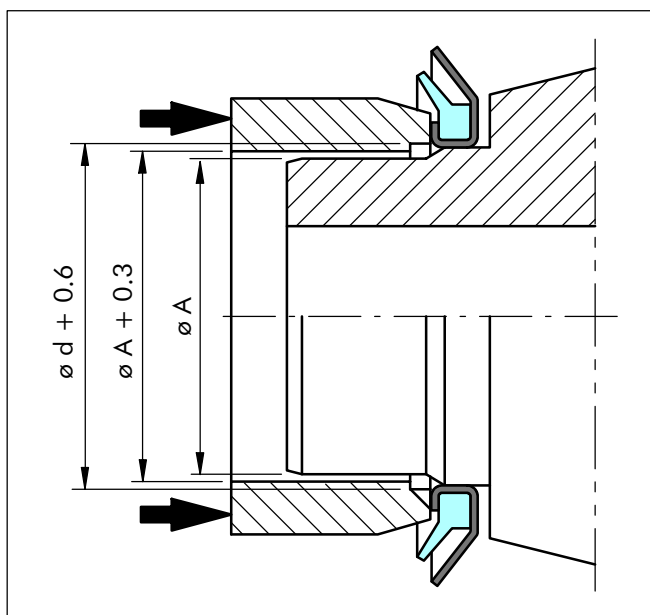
Assembly tool. When positioning the GAMMA seal against a shoulder it is important not to deform the case by pressing with too high load
